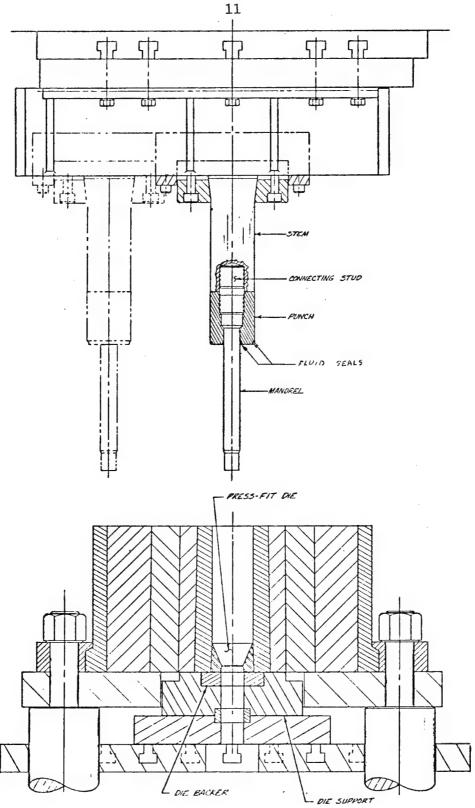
TOOLING SET-UP TO BE UTILIZED IN BATTELLE'S 2500-TON PRESS FOR TORSION-TUBE EXTRUSION
